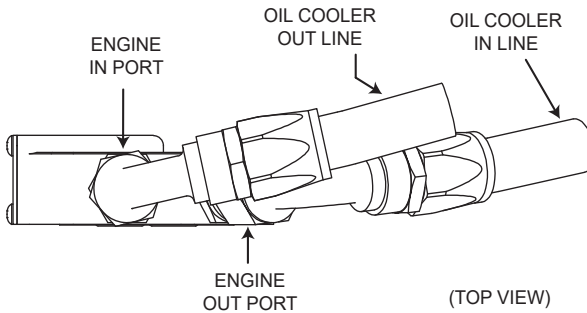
Oil Cooler Adapter Line Fitting Orientation
